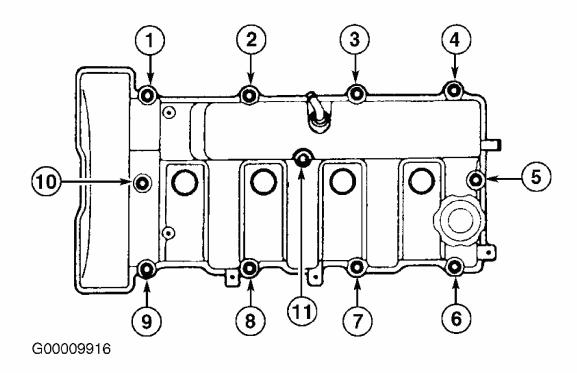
Valve Cover Bolt Tightening Sequence (Protege) Courtesy of MAZDA MOTOR CORP.
